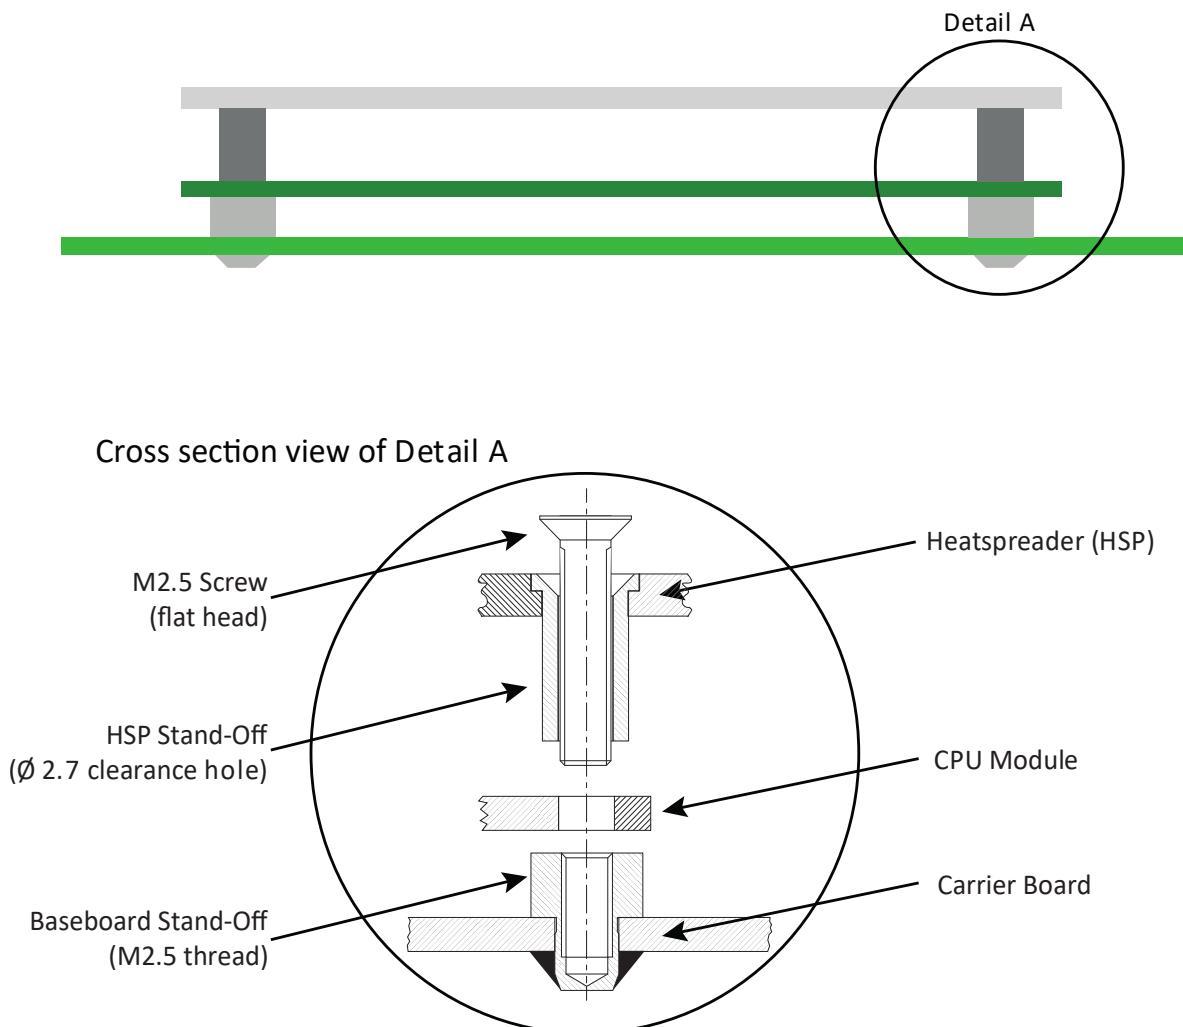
Heat Spreader Assembly Mounting to Carrier With Broaching Nut – Top Side Screw Access
